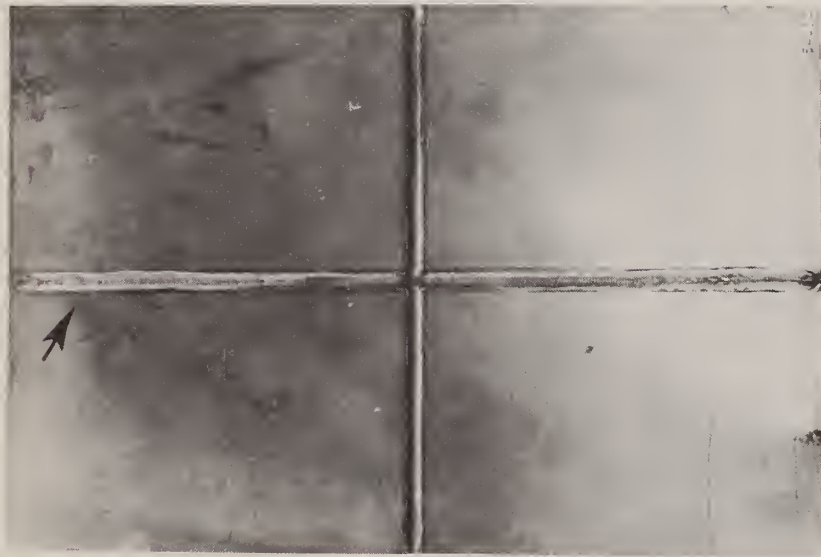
Type 301 stainless steel with a cross-bead weld after exposure for approximately 8 years at Site C. With the exception of a small corrosion pit and tunneling corrosion observed at the weld (arrow), this specimen was relatively unaffected by corrosion. X0.3.
